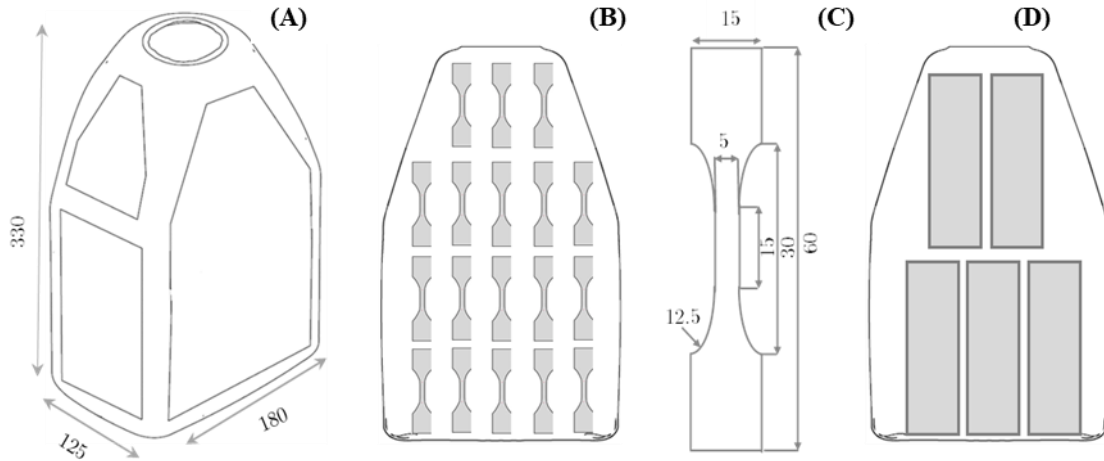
(A) Isometric view of a bottle (B) Tensile test samples representative cutting plan (C) Real dimension of the tensile test sample (D) Bending test samples representative cutting plan (all dimensions are in mm)
